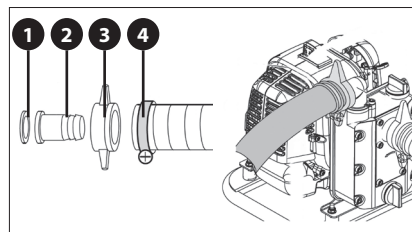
, method for attaching hose connector to the pump and connecting a hose
